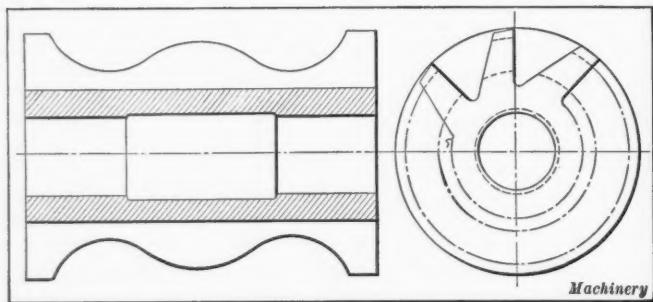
Milling Cutter for producing Three-tooth Impeller of 4 inches Pitch Diameter
